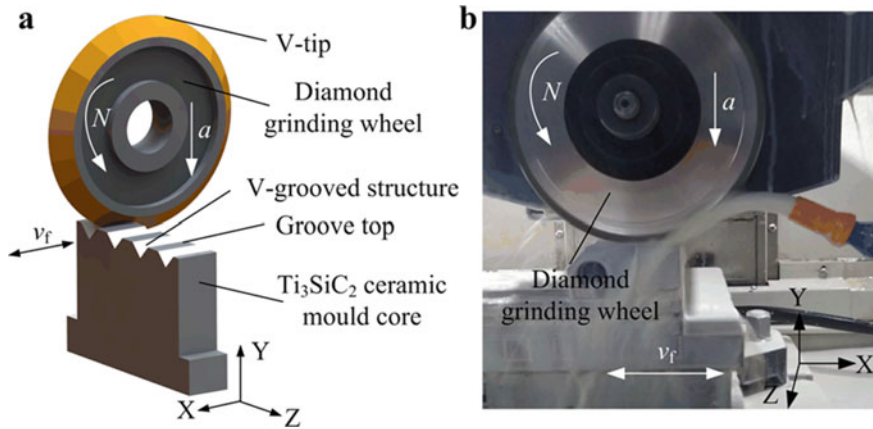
Micro-grinding machining scheme and image of mold core: a Schematic diagram of V-grooved structures machining; b Image of micro-grinding
